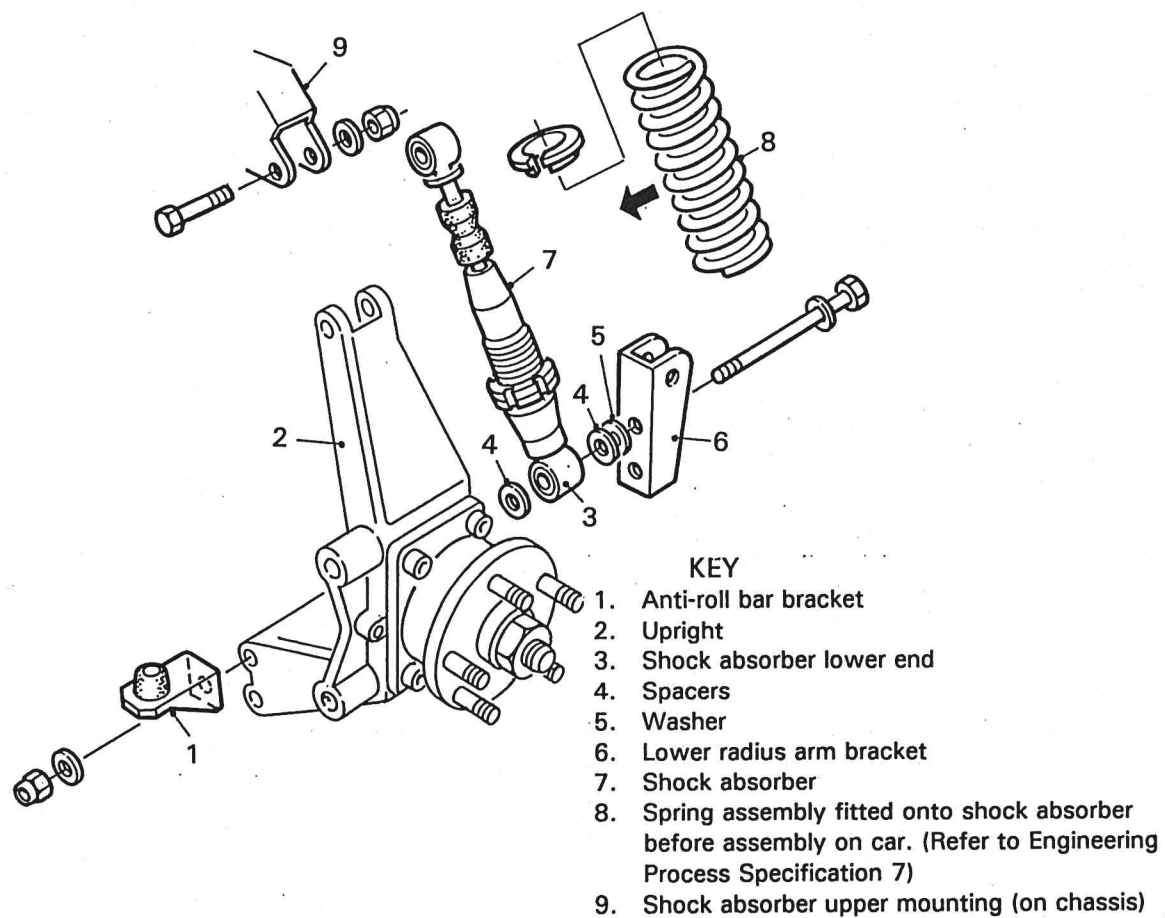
Rear Shock Absorber Assembly (RH Side)
